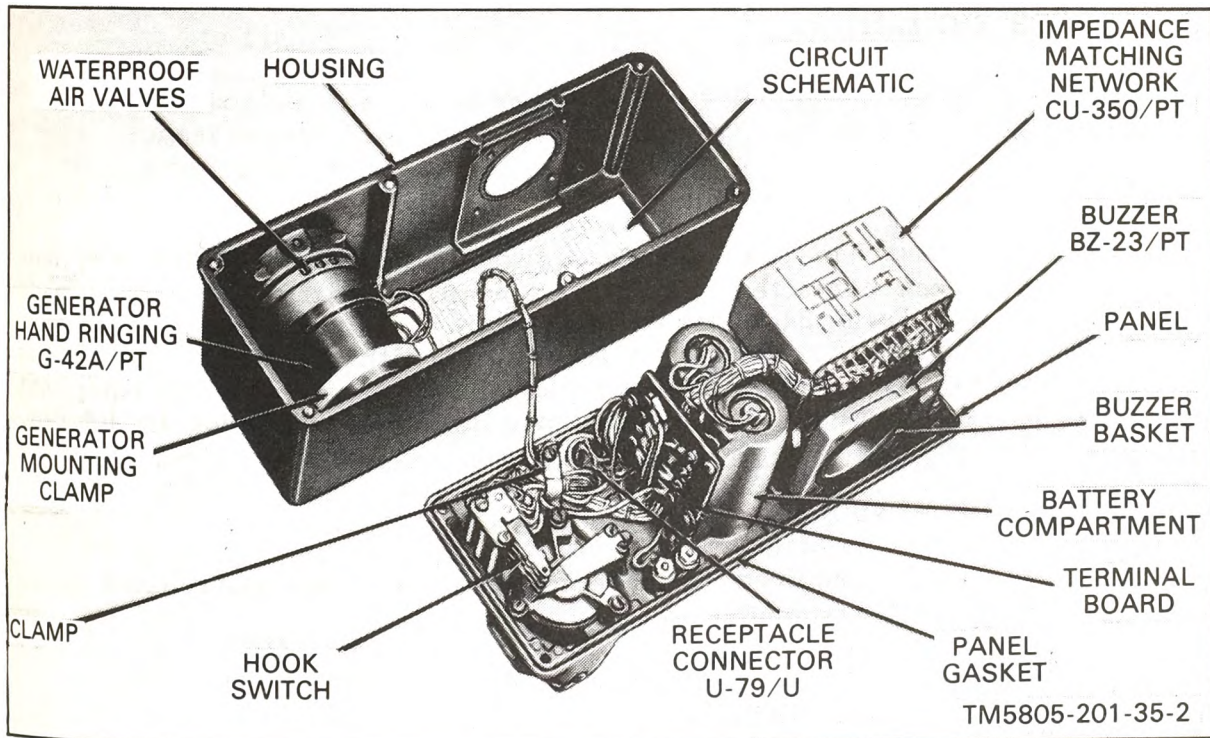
Telephone Assembly TA-312/PT (Panel Assembly Removed from the Housing)
